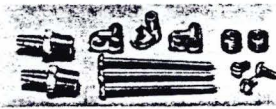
Standard gage mounting accessories furnished are two 1/8" SPT plugs for duplicate pressure taps, two 1/8" pipe thread to rubber tubing adapters, and flush mounting adapters with screws.
